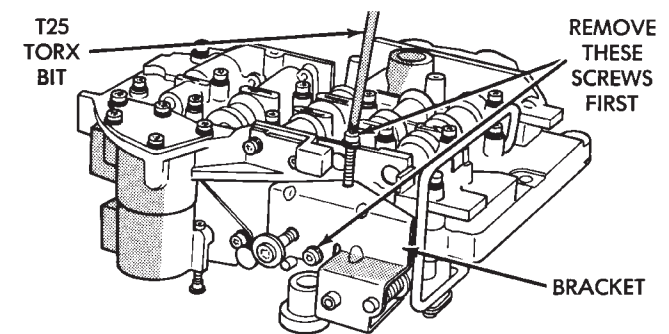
Adjusting Screw Bracket Fastener Removal/Installation
